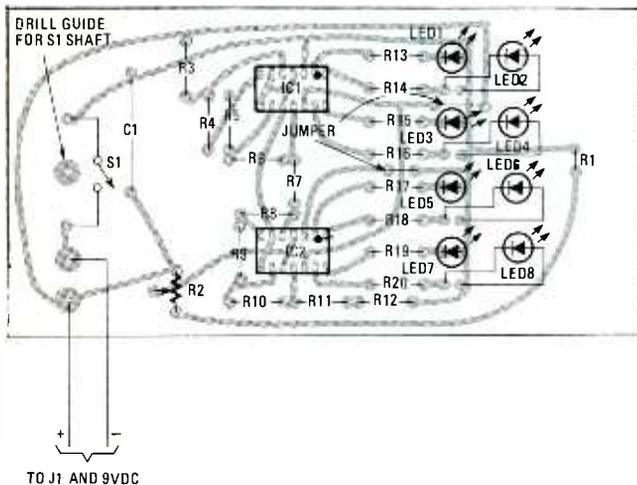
PARTS LOCATION for the project shown here appears with the foil side down. Be extremely careful when mounting photoresistor R1. Text gives complete details.
